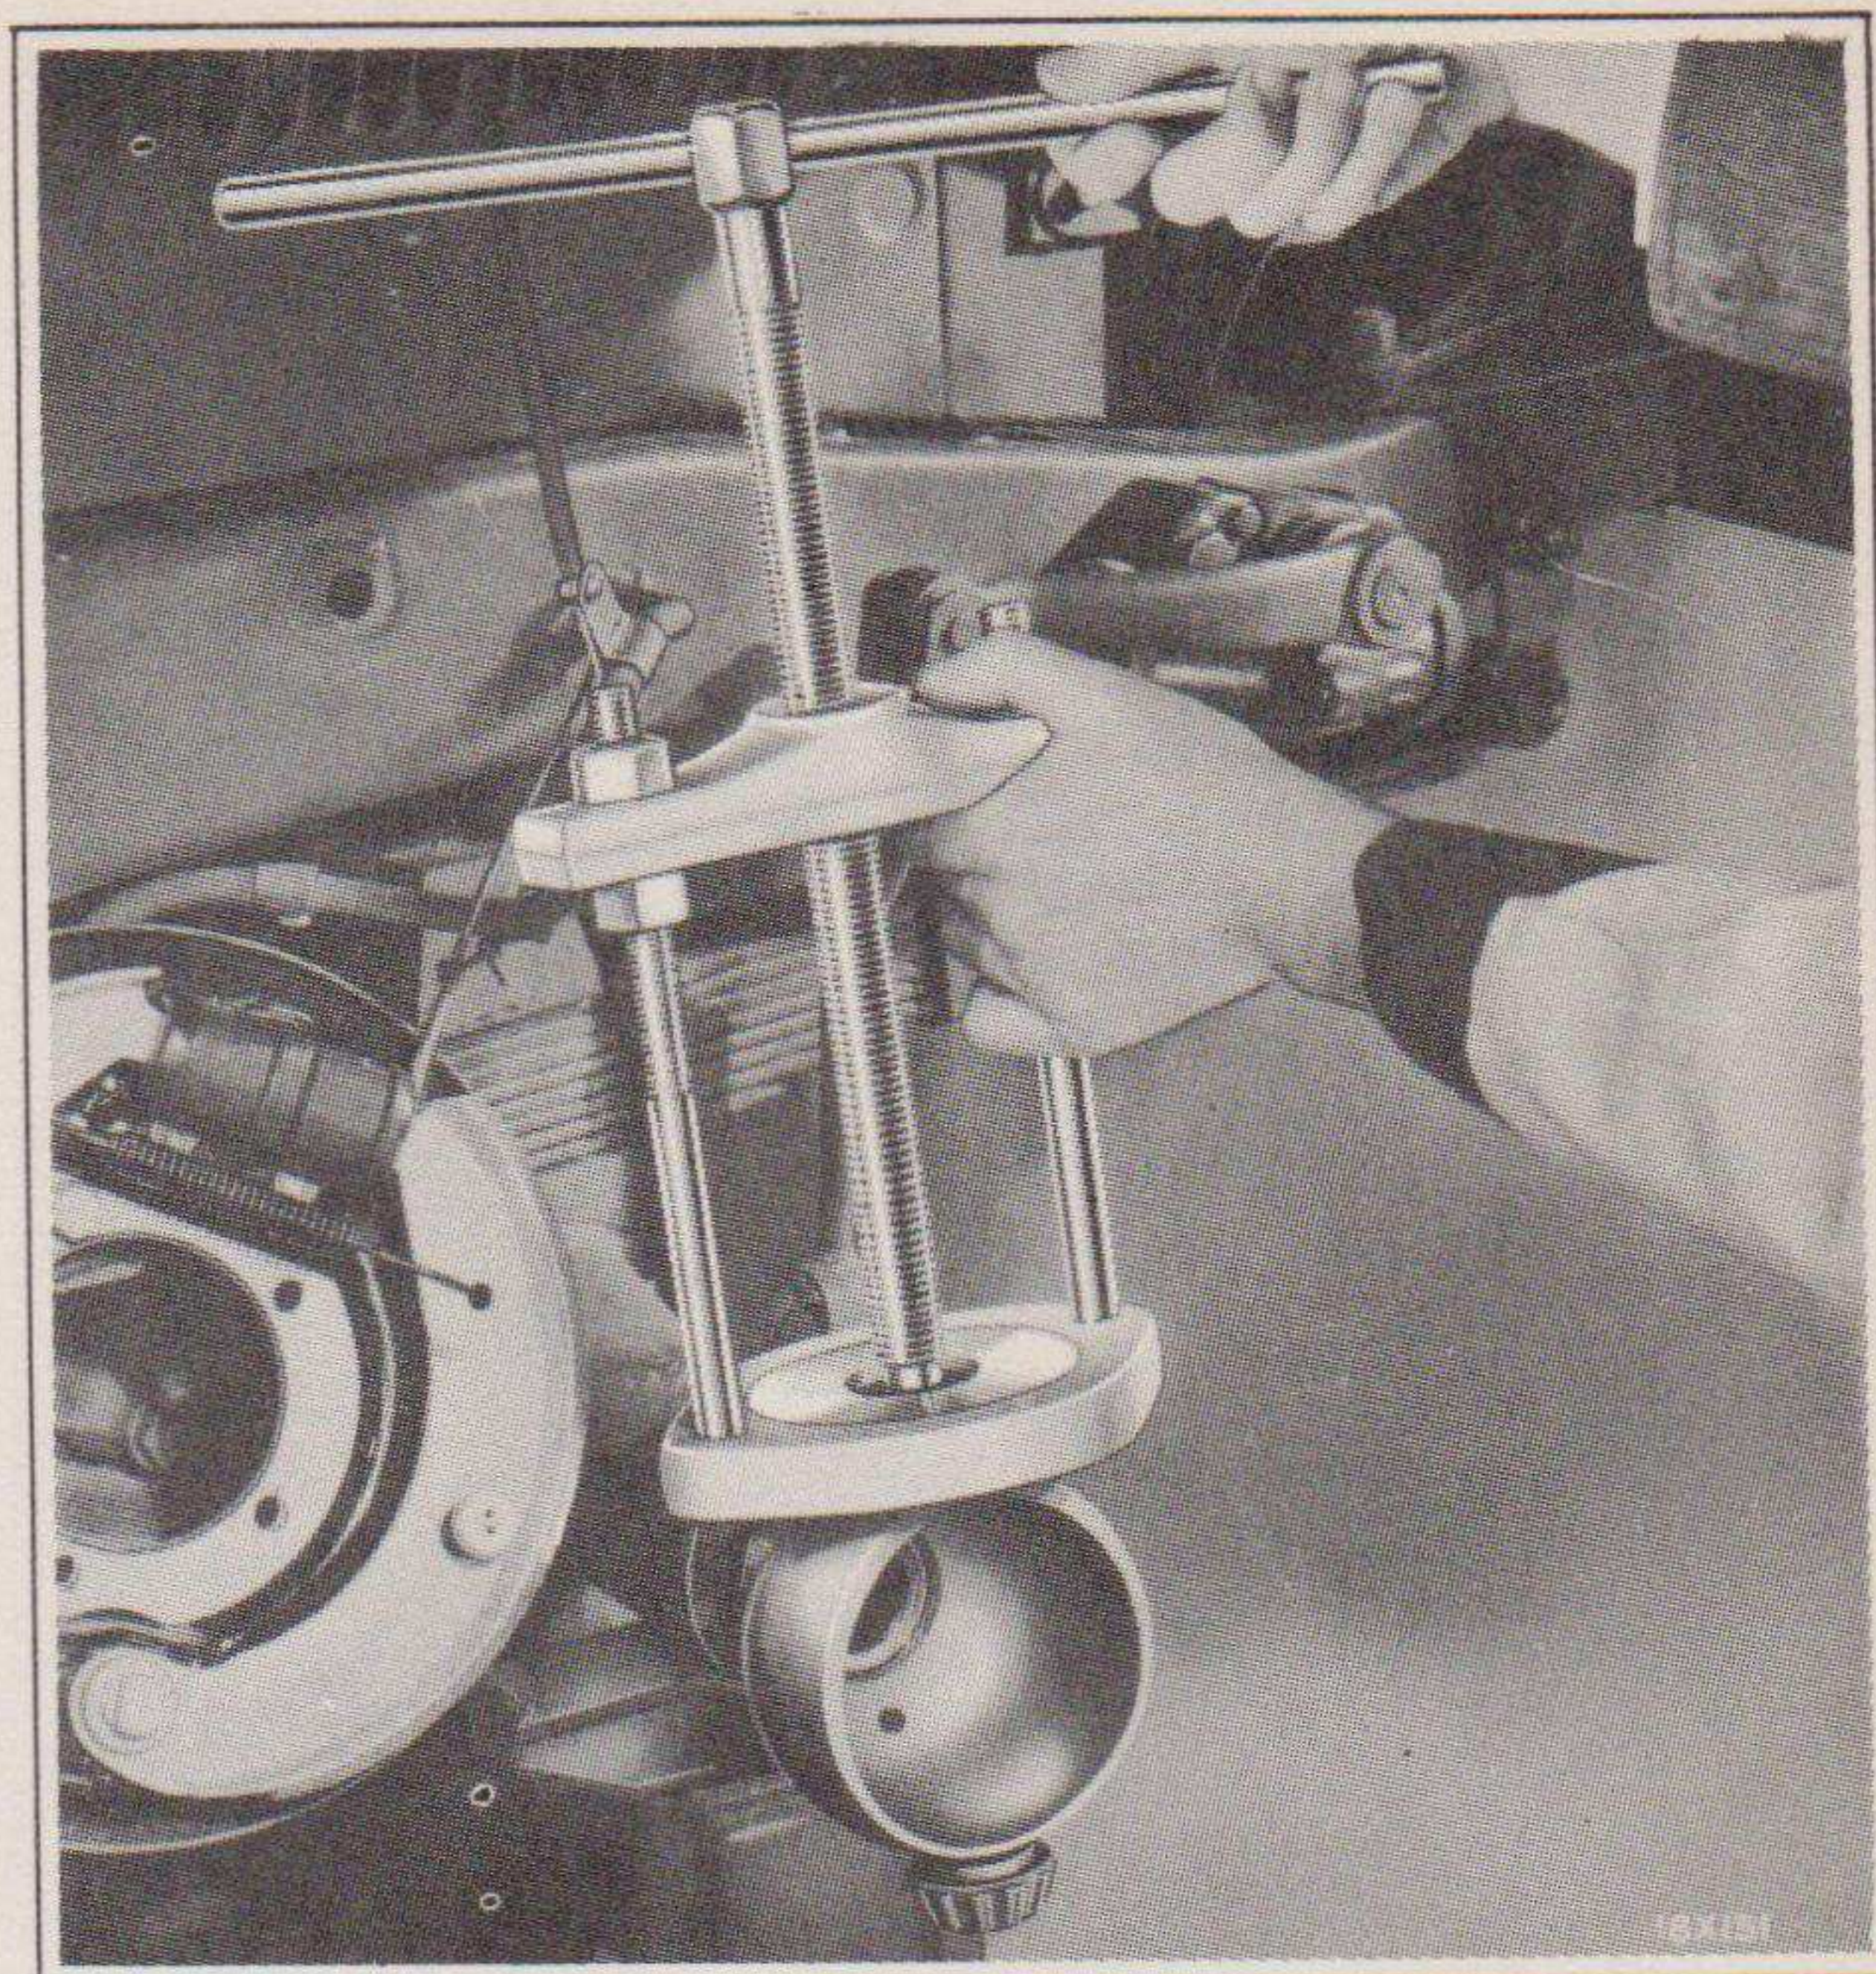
Removing Steering Knuckle Flange Bearings (Tool C-293-U)
